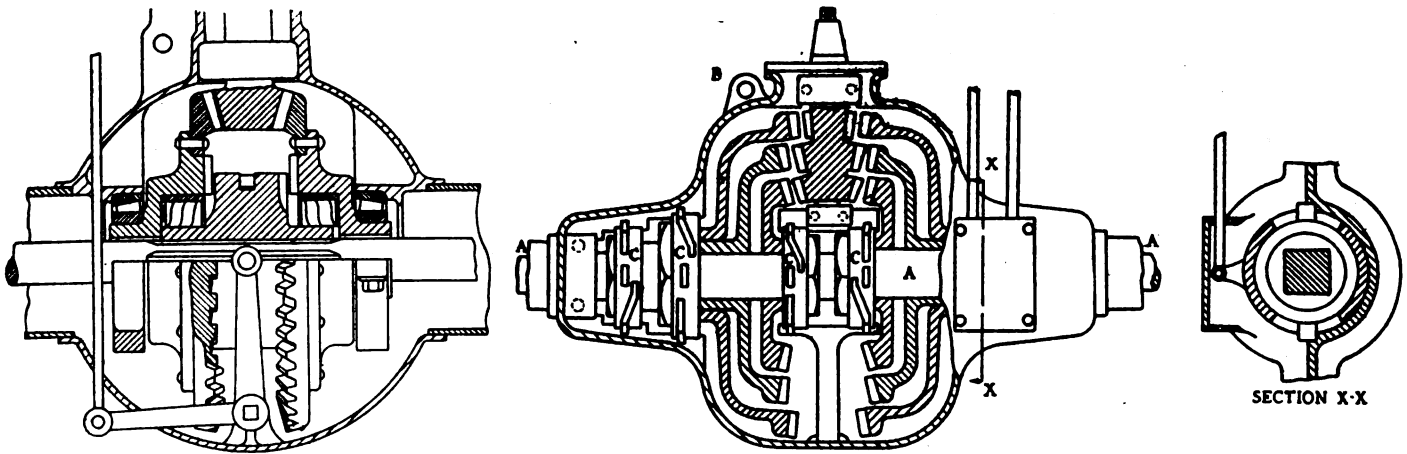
(Left)—Simple high speed reverse gear. Differential is replaced by a jaw clutch which engages either of two constant mesh ring gears. Fig. 8—(Right)—A direct drive transmission for rail car axles. Any of the ring gears can be engaged, thus affording three speeds in either direction
